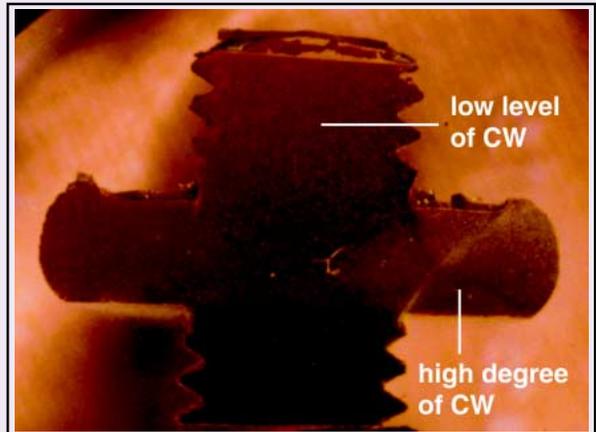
Macroscopic view of forged bolt showing various levels of cold work
